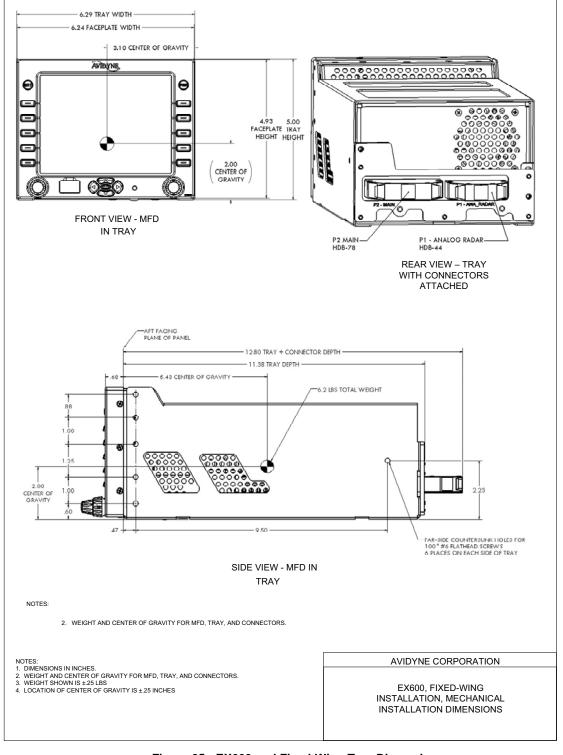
EX600 and Fixed-Wing Tray Dimensions
